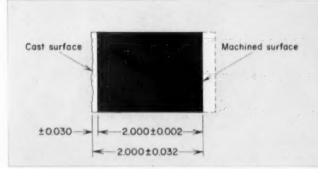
Simple cast part with machined surface represents a common type of production tolerance problem.
